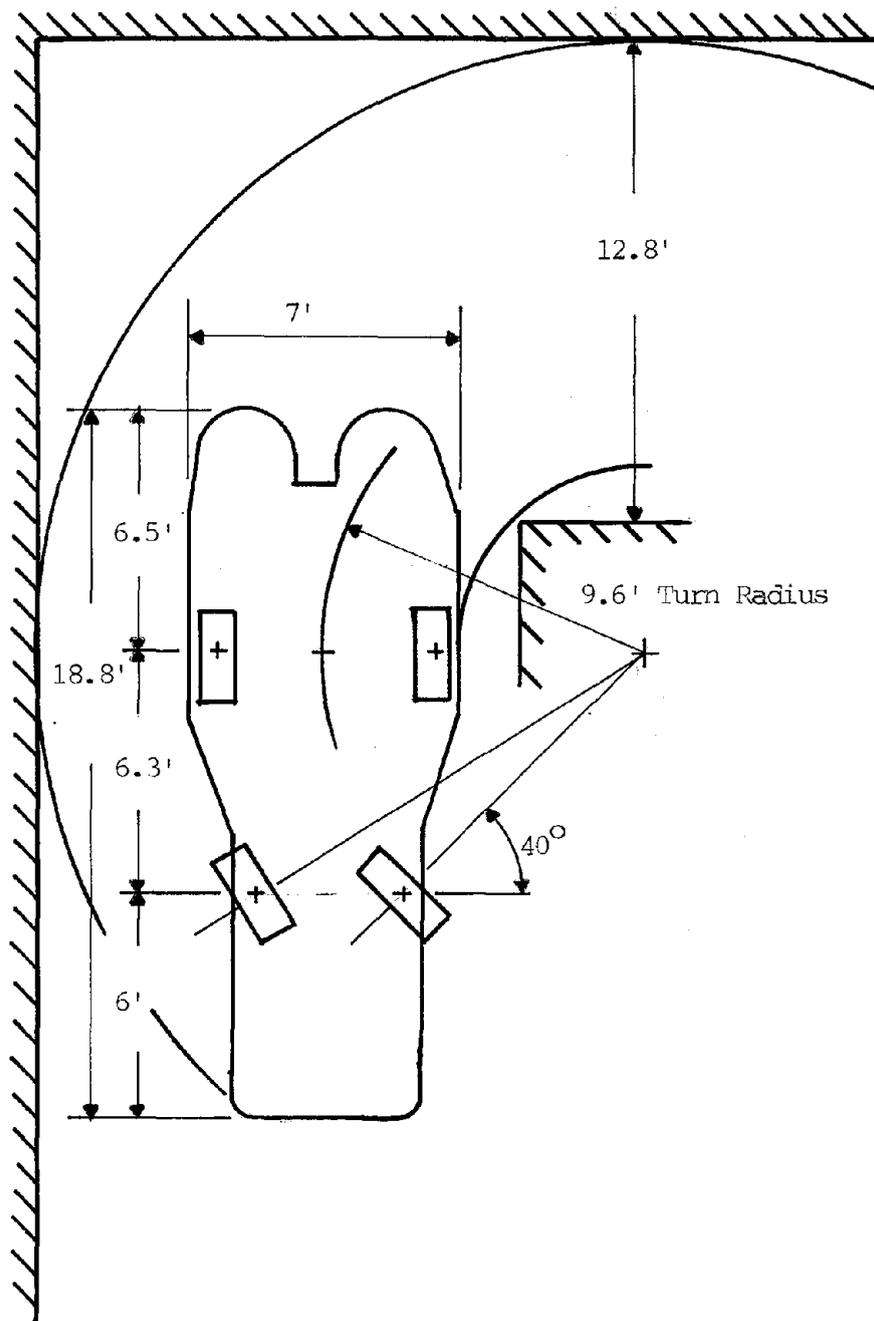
Turning Study #1 of the Transfer Bolter - Dual Boom (New Chassis)
